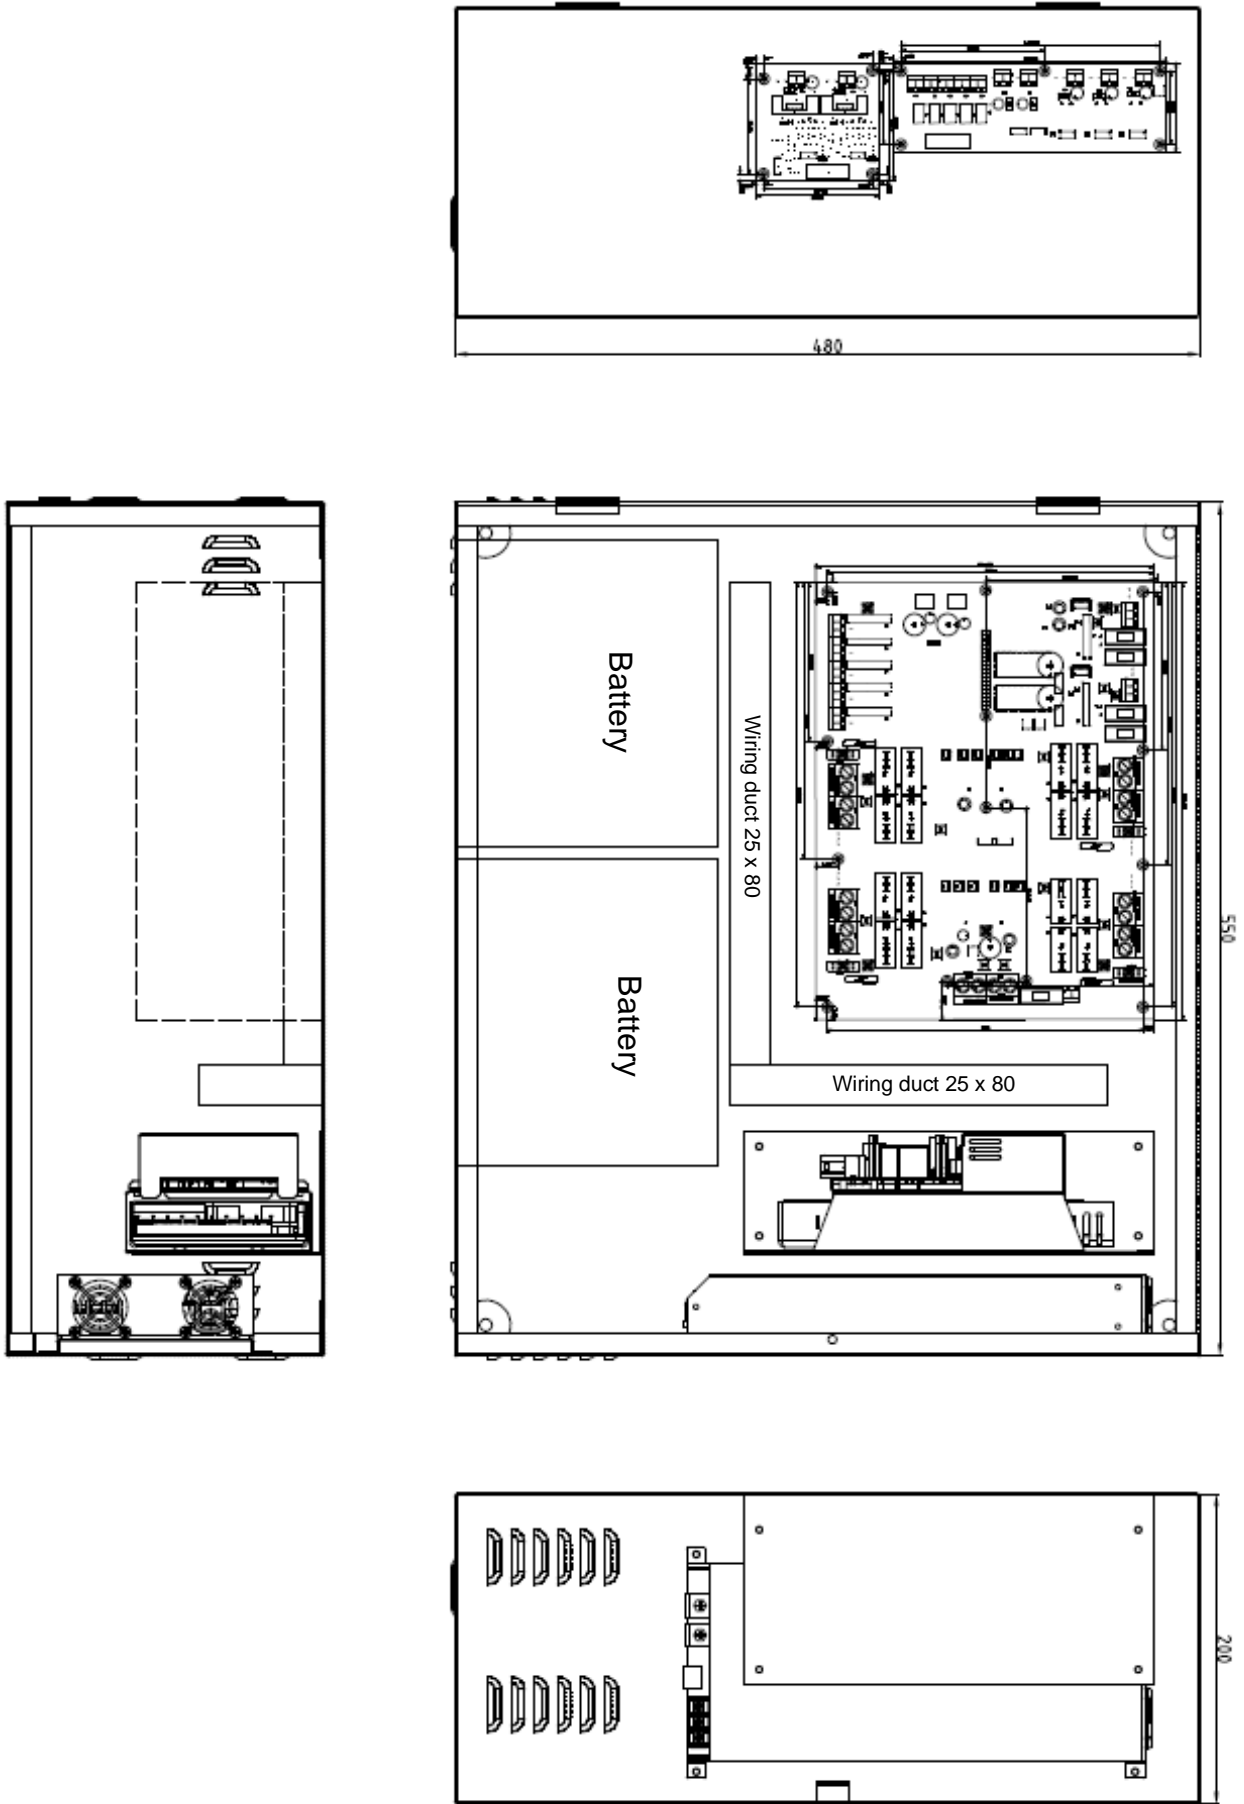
SR-300 RYŚ IP40 smoke extraction control panel housing with dimensions.
